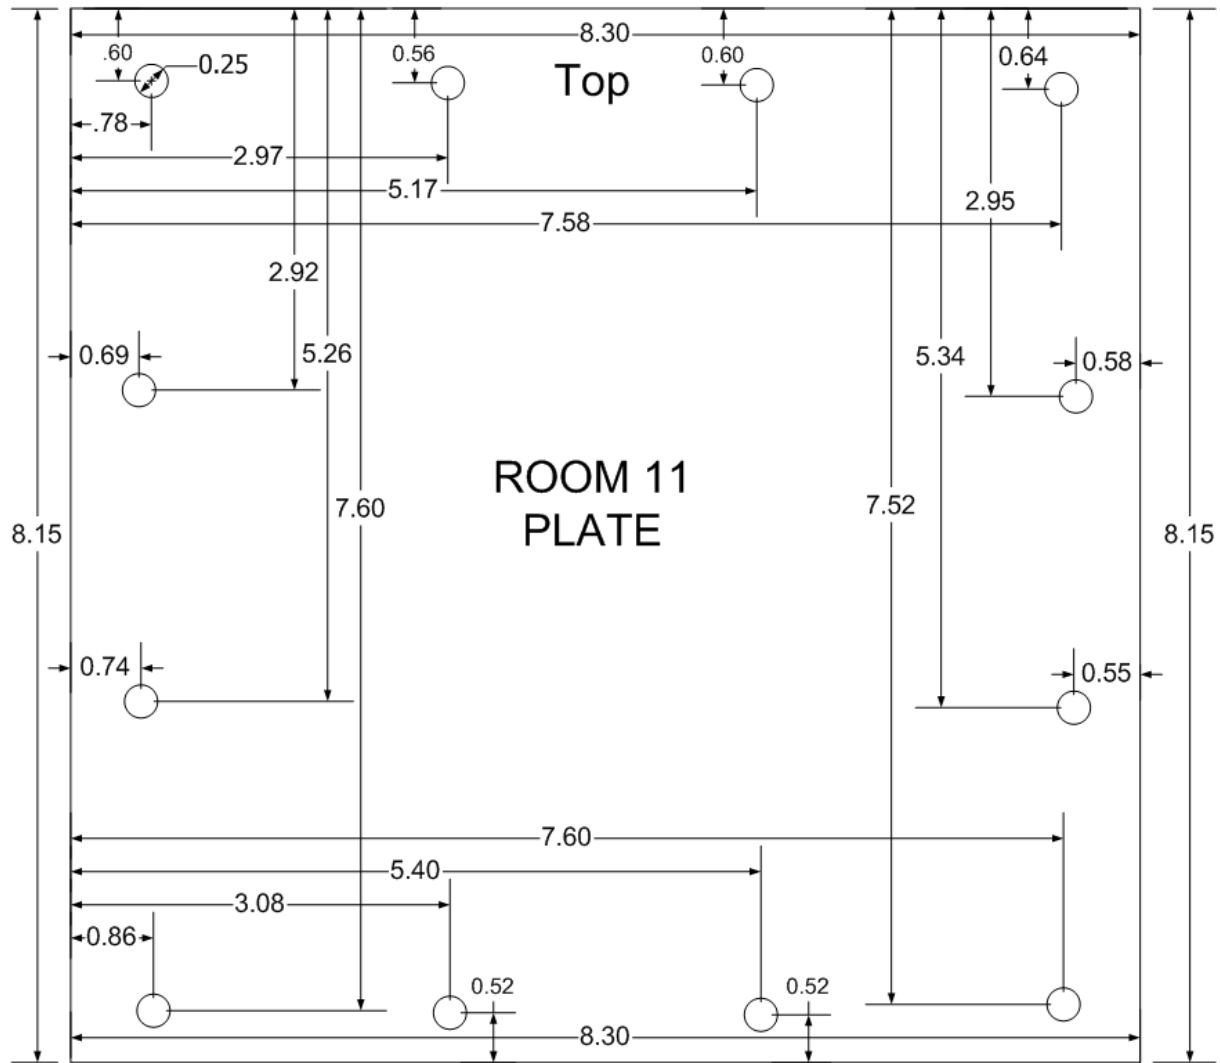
Room 11M (Test Room) Waveguide Plate w/ Dimensions
